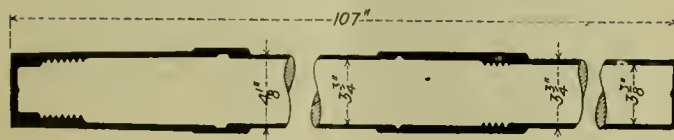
SECTION SHOWING METAL REMOVED (IN BLACK) FROM ROUGH FORGING.
